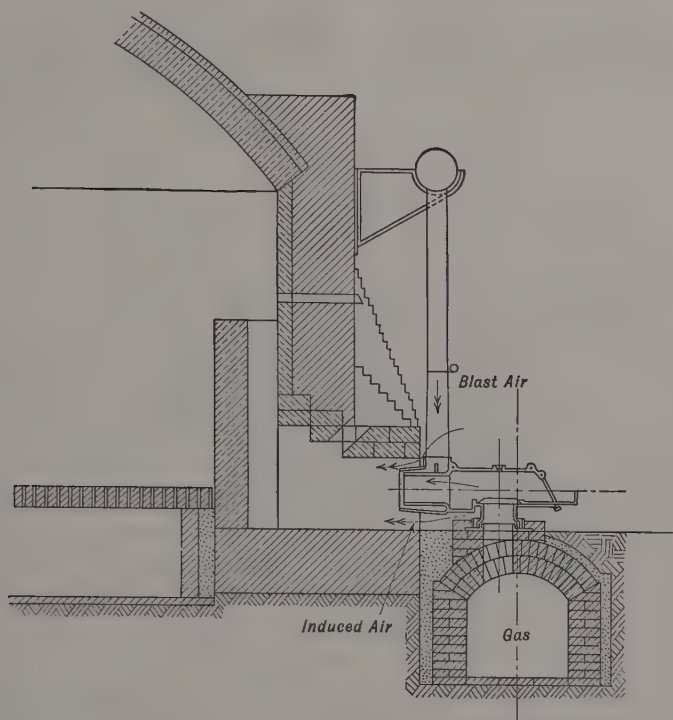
Nozzle-mix burner for producer gas. A large fraction of the combustion air is induced by stack draft.
